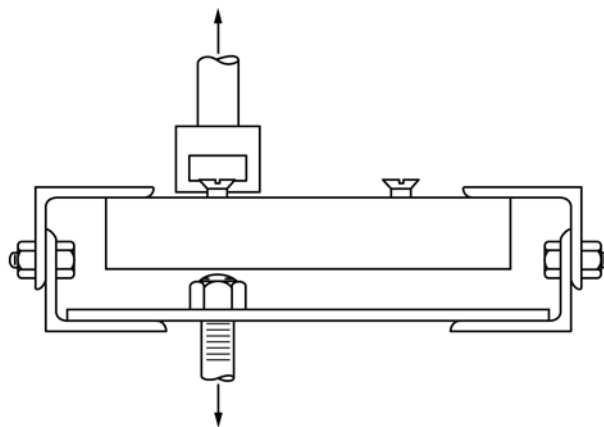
Diagram of Assembly for Screw Withdrawal Test
